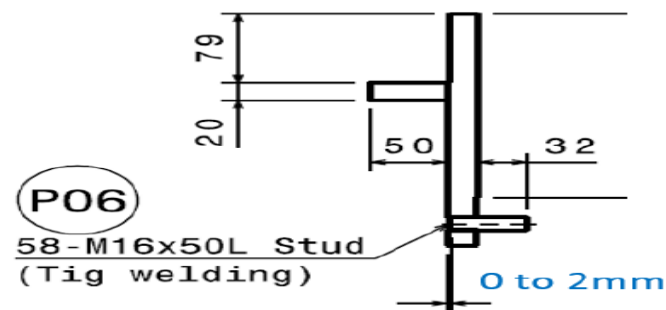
Stud bolt removal and tack welding after replacement
